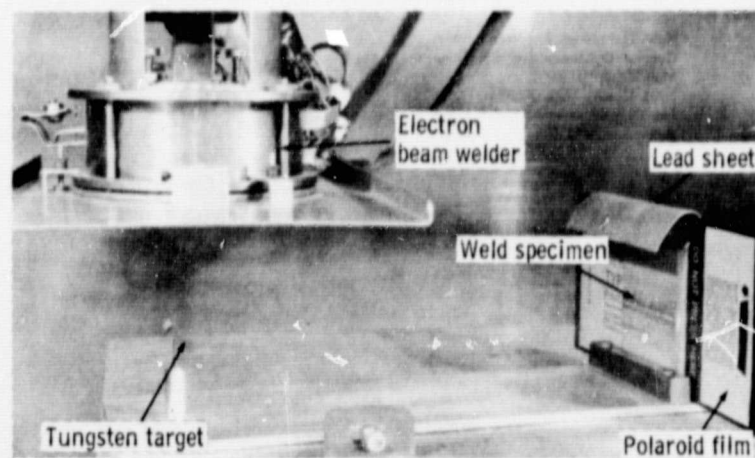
Electron beam welder x-rays its own welds.
